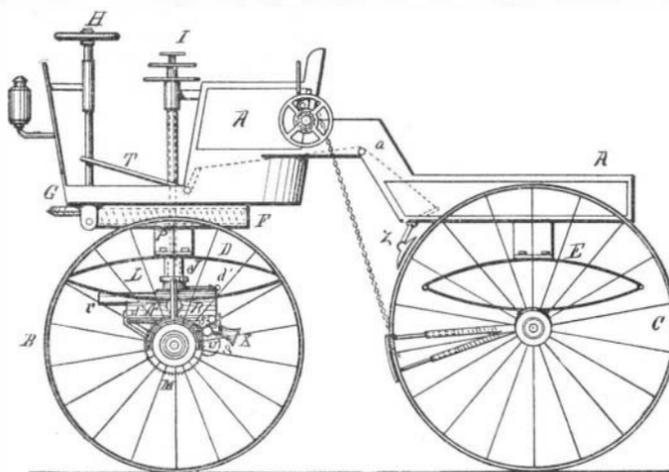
SIDE ELEVATION OF SELDEN CARRIAGE.
